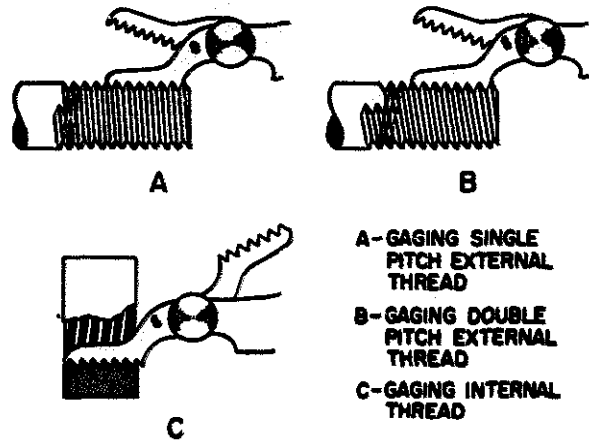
Using a screw pitch gauge to determine the number of threads per inch.
